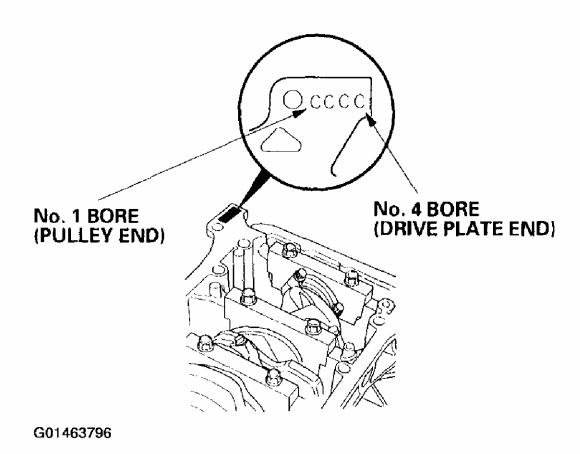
Locating Crankshaft Bore Code Courtesy of AMERICAN HONDA MOTOR CO., INC.
